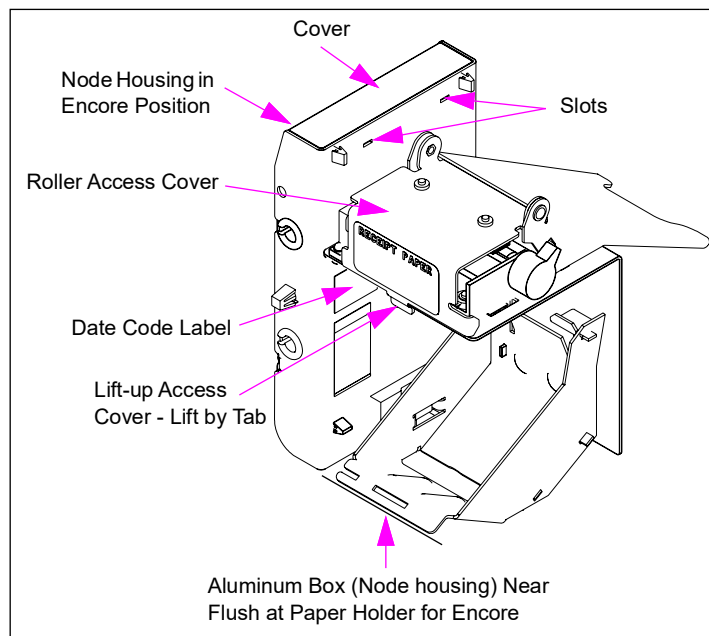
CRIND Printer Assembly Module - Eclipse
